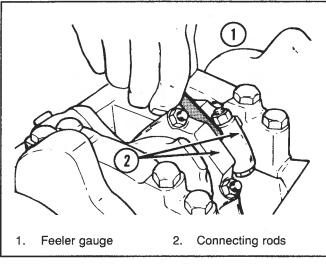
Measuring Connecting-Rod-Side Clearance
